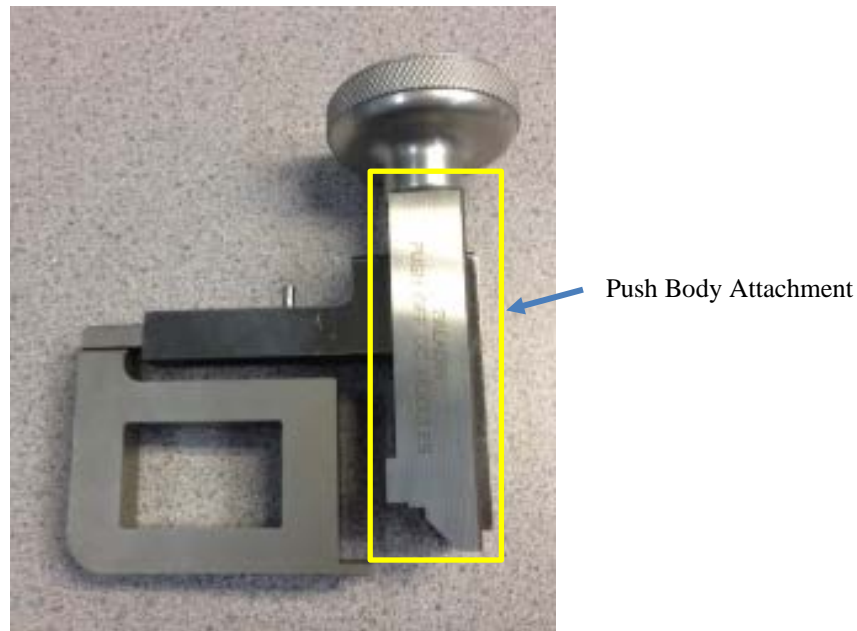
Paladin RAF Module Removal Tool with Push Body Attachment
